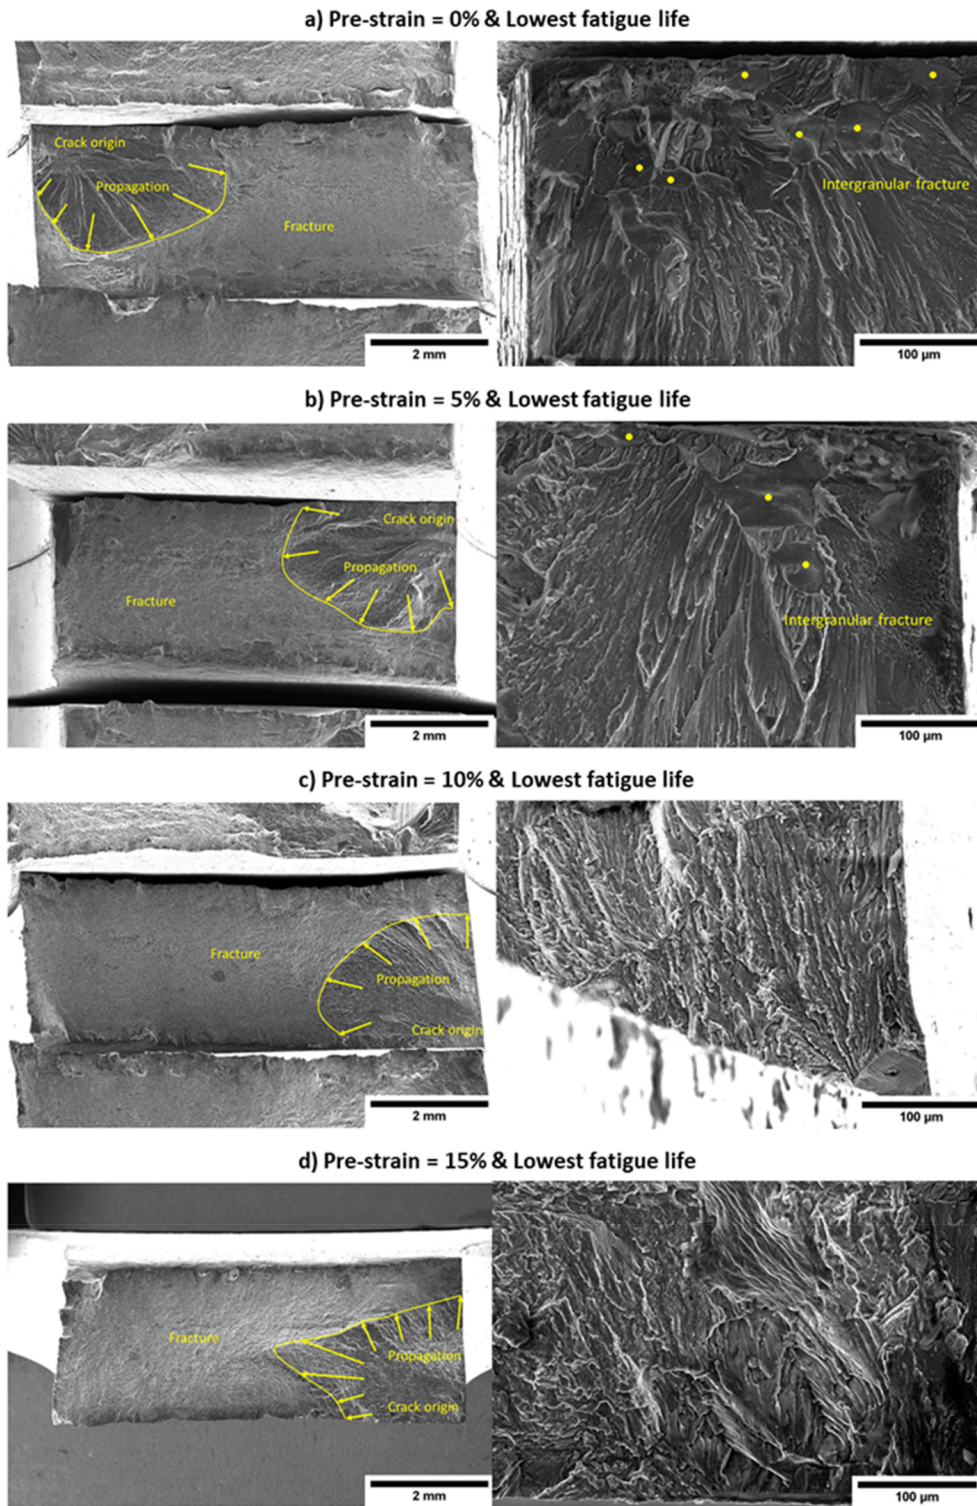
Fracture surfaces of fatigue specimens (lowest fatigue life) observed by SEM.
